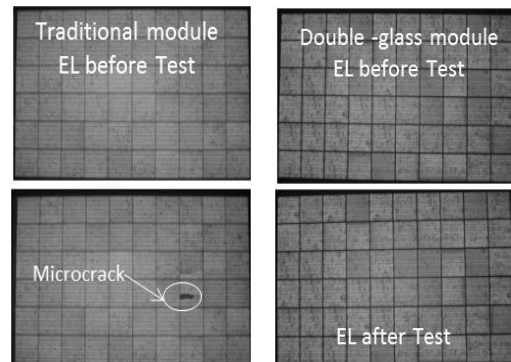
EL picture of Traditional module and double-glass module before and after mechanical test
